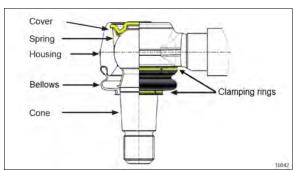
TIE ROD BALL JOINT CONSTRUCTION
